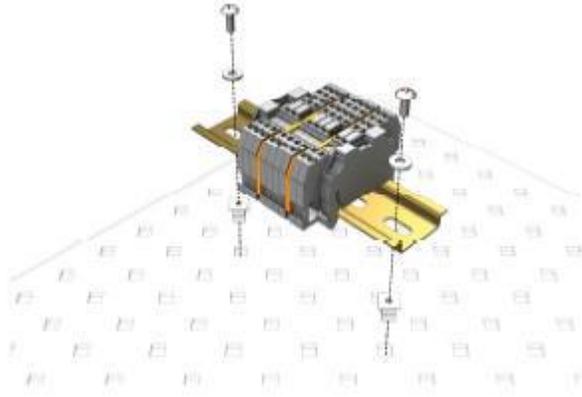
DIN-Rail bracket mounted onto an enclosure backplate
